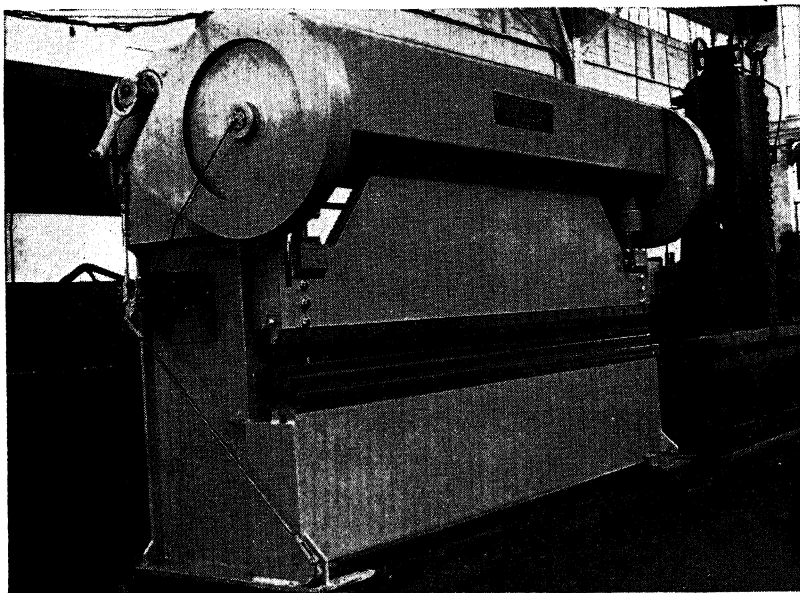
Bending press of all welded steel construction. The one-piece rigid steel frame takes heavy loads with minimum deflection, saving power and avoiding wear on ways and bearings.
